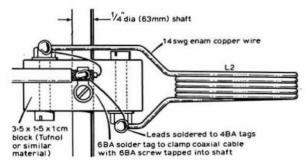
The four-turn swing-link assembly. The 6BA solder tag used to secure the link-coil end of the coaxial cable is insulated from the outer braid by the exterior polyvinyl insulation of the coaxial cable. The link coil coupling shaft is "earthed" to the case at each end by the brass bushes used to support it. No ill-effects have been noted
